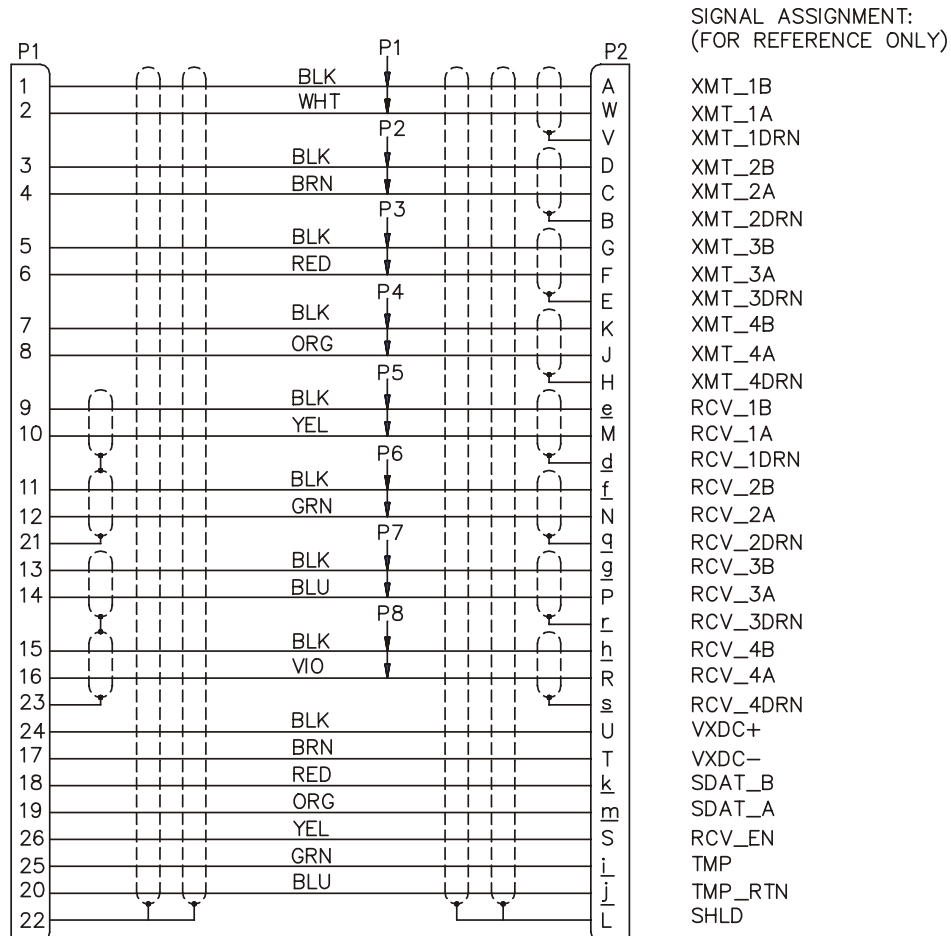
External I/O Cable Wiring (Drawing Number 73A-6010)
